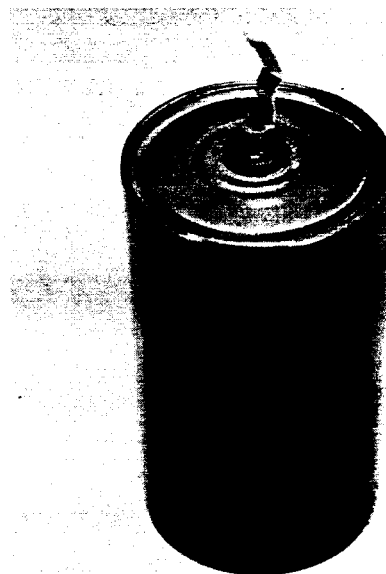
HELI-ARC WELD TECHNIC
